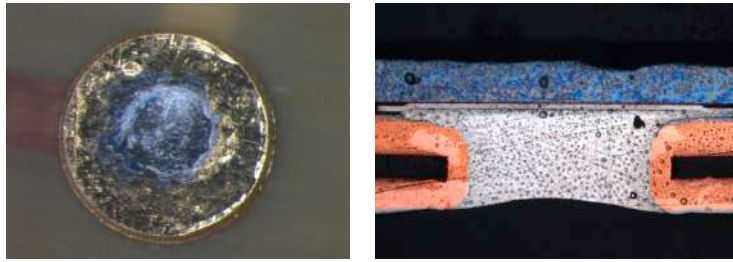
shows on the left hand side a top view picture of a melted ball after soldering and on the right hand side the metallurgical cross section analysis of a soldered connection after embedding the Module in resin, cutting and polishing. The good wetting of the solder on the chip pad and on the FPC is clearly visible.
